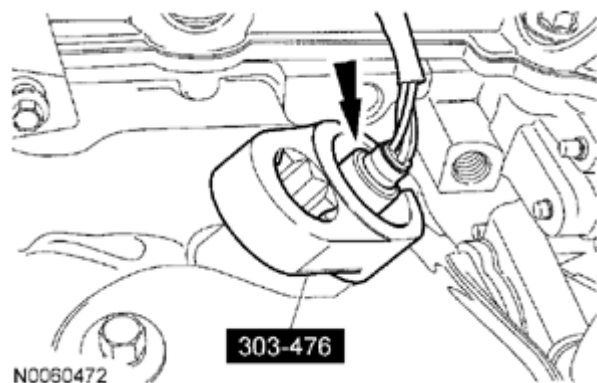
Removing RH HO2S Using Exhaust Gas Oxygen Sensor Socket
